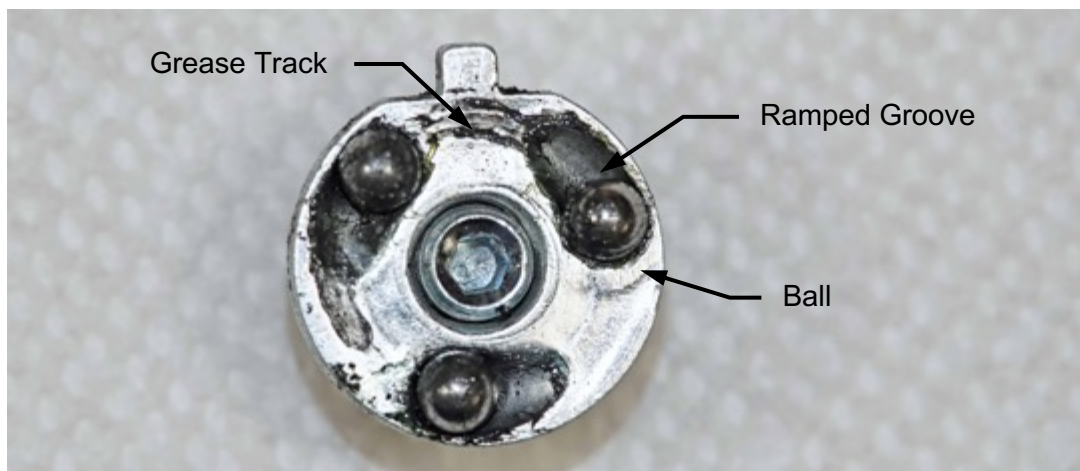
The face of the Piston Cam from a defective caliper.
